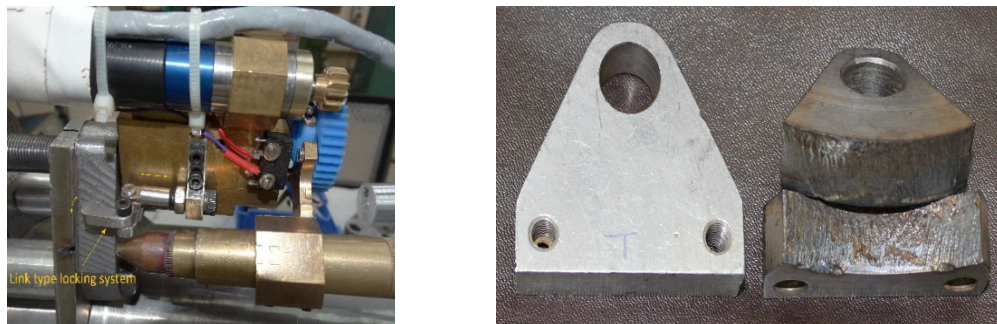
(a) Laser cutting fixture mounted on triangular block and (b) triangular block of yoke assembly along with its cut sections.
